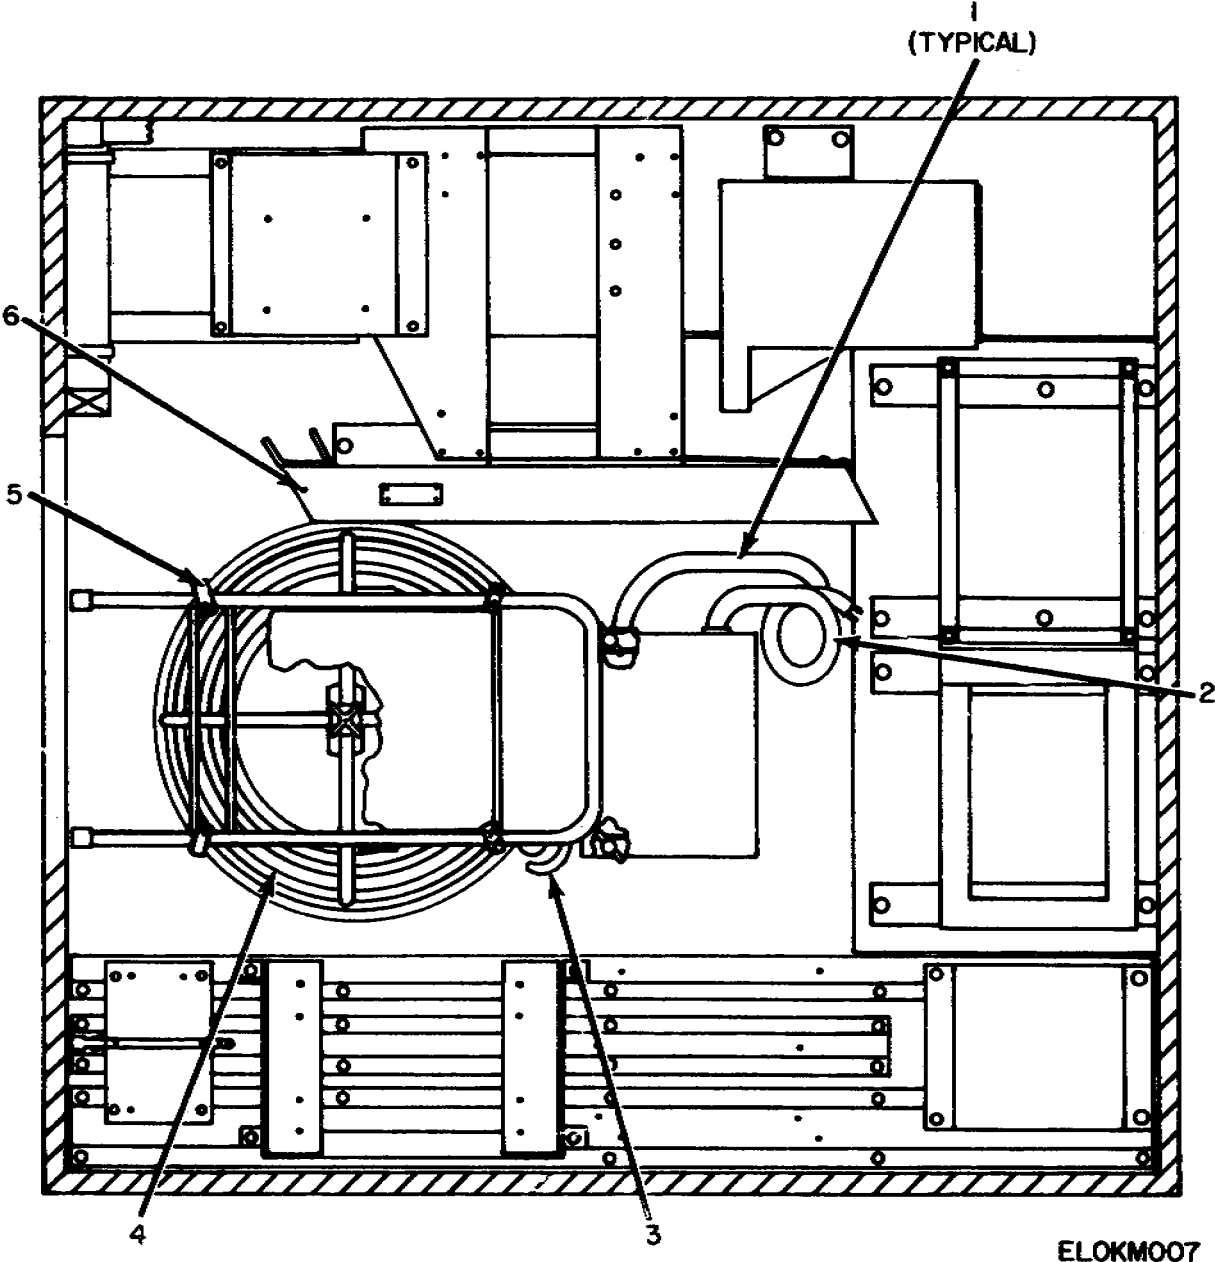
Shelter, Electrical Equipment S-336/TRC-112 Interior, Floor Plan
